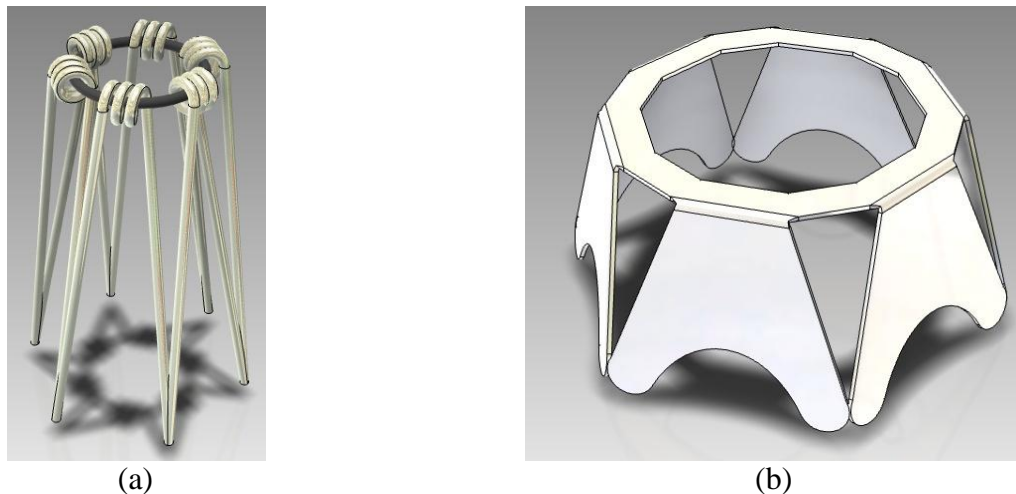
Hair removing tools: (a) Spring wire, (b) Spring plate, these designs were not manufactured due to the high level of detailing that was not possible to produce with spring metal
